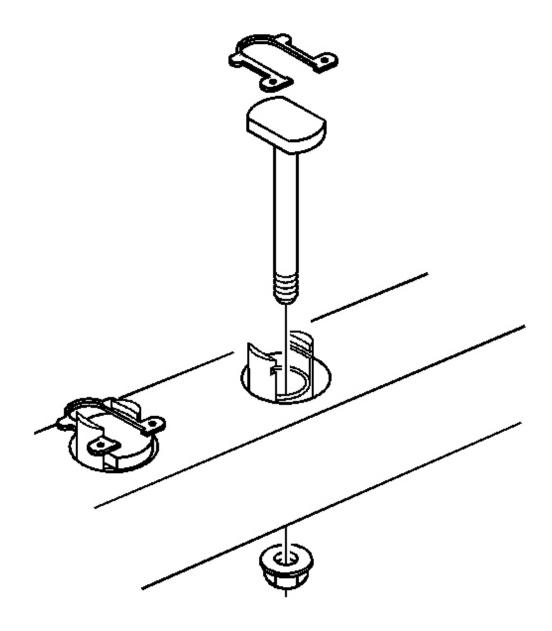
View Of Crossmember Bolt & Spring Clip - Front Courtesy of GENERAL MOTORS CORP.
